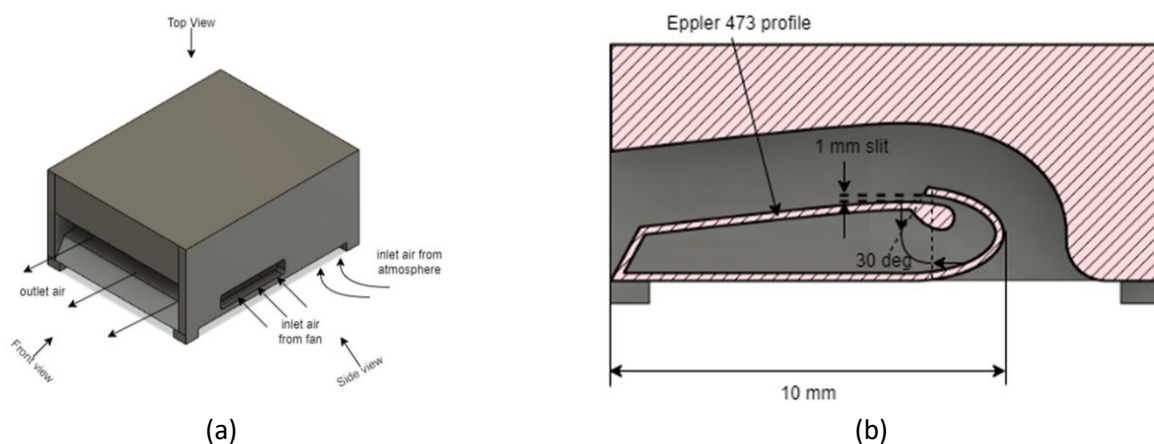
View (a) Isometric view of Design 2 (b) Cross-section view of Design 2
